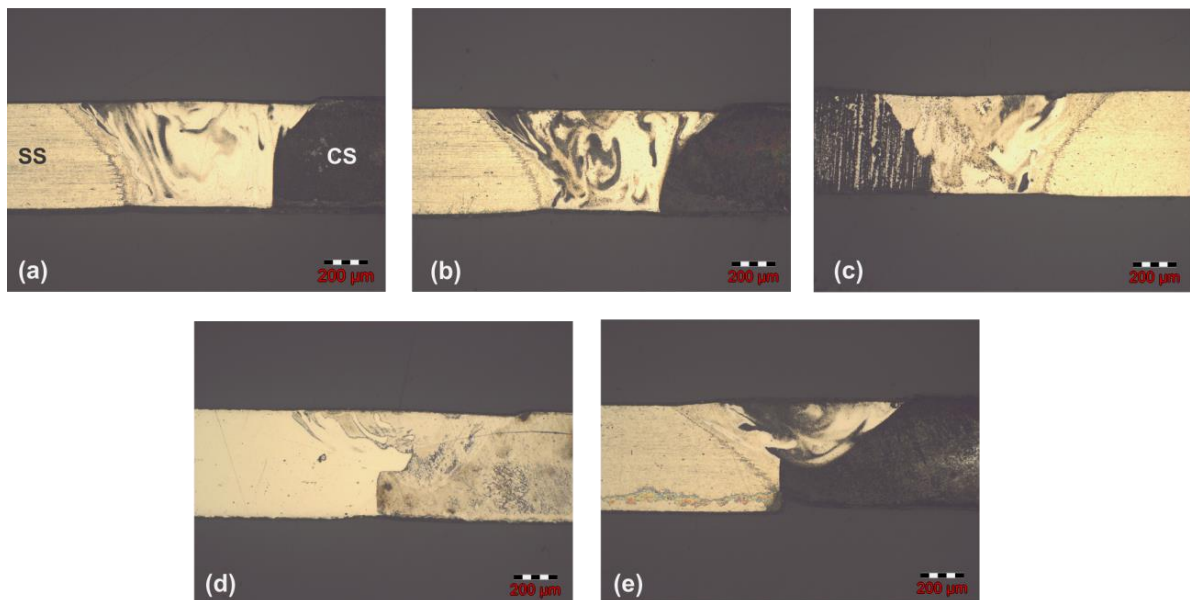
Low magnification cross-section of CS-SS laser welding; (a) sample 3.1, (b) sample 3.2, (c) sample 3.3, (d) sample 3.4, (e) sample 3.5 [STA18].
